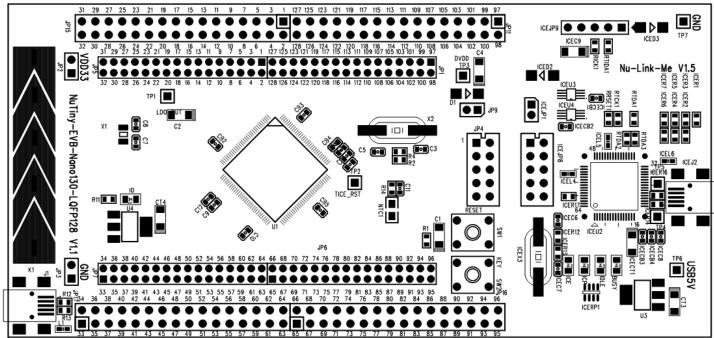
NuTiny-SDK-Nano130 PCB Placement
